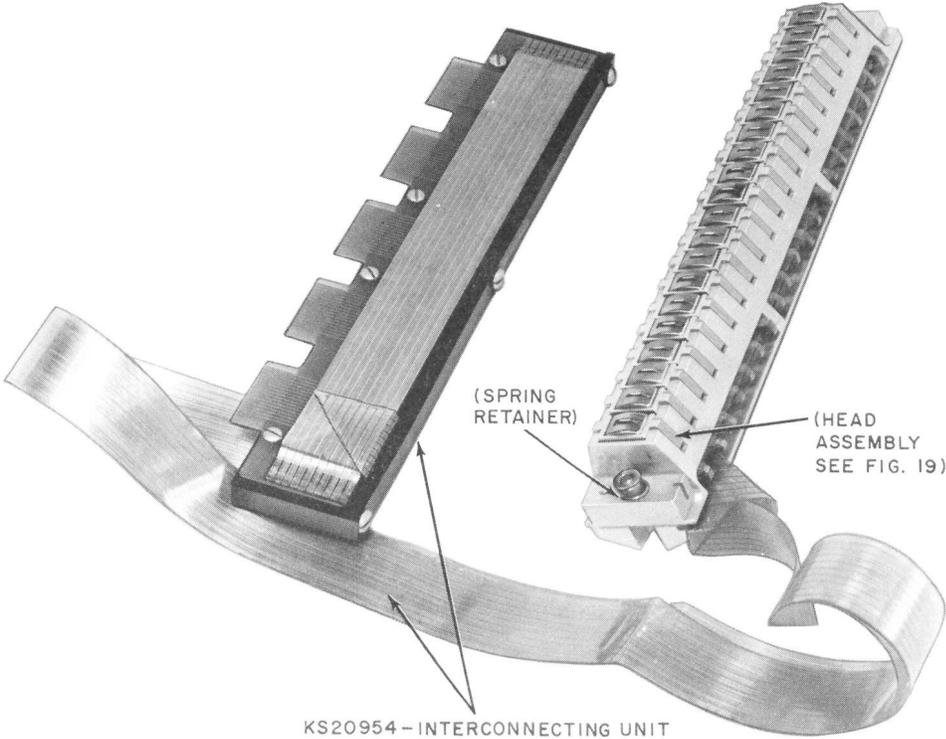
Head Bar Assembly and Interconnecting Unit Removed From Recorder Unit
